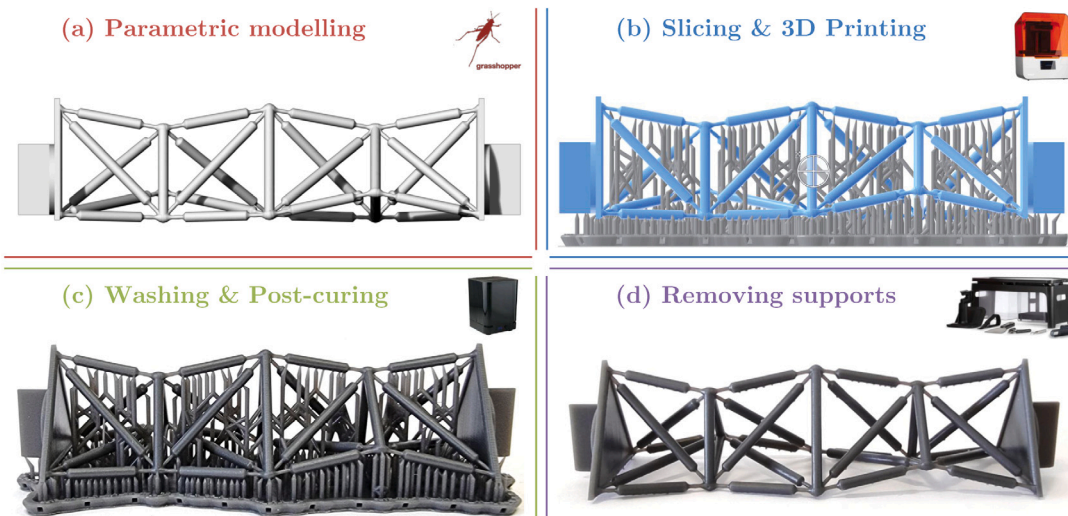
Fabrication process: (a) parametric geometrical model; (b) preview of the sliced model; (c) printed sample after the washing and post-curing process; (d) printed sample after removing the supports.
